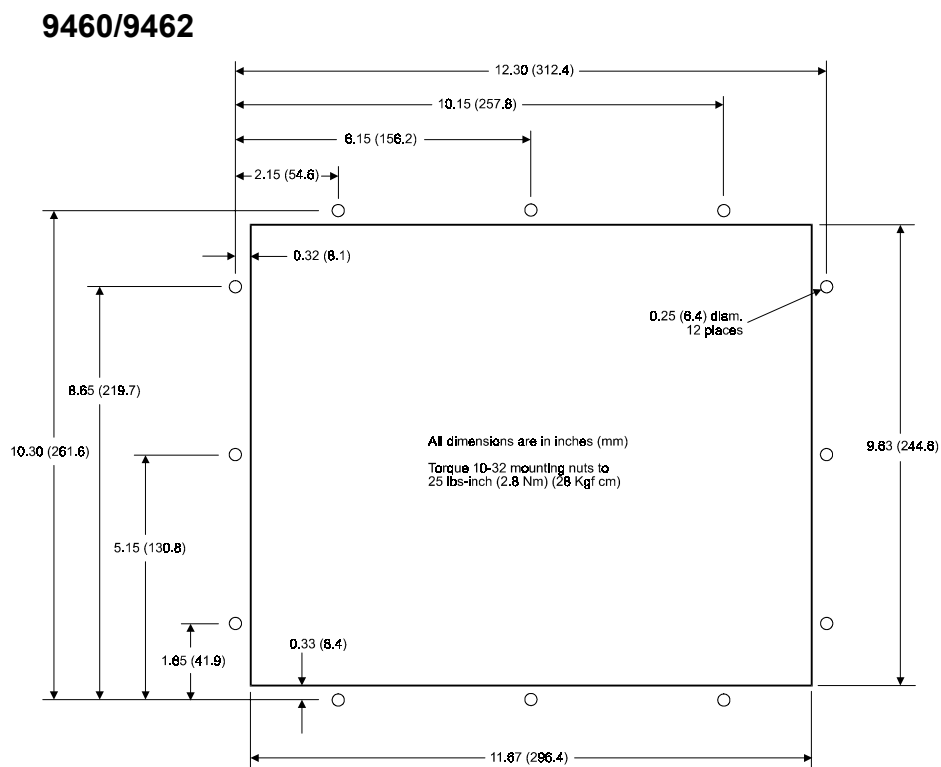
18. 9460/9462 System Cutout Dimensions
